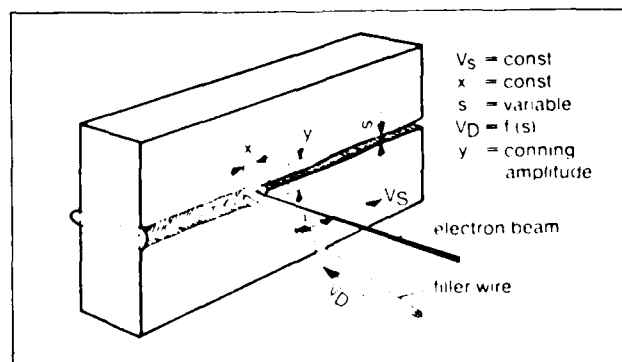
EB-WELDING WITH FILLER WIRE
